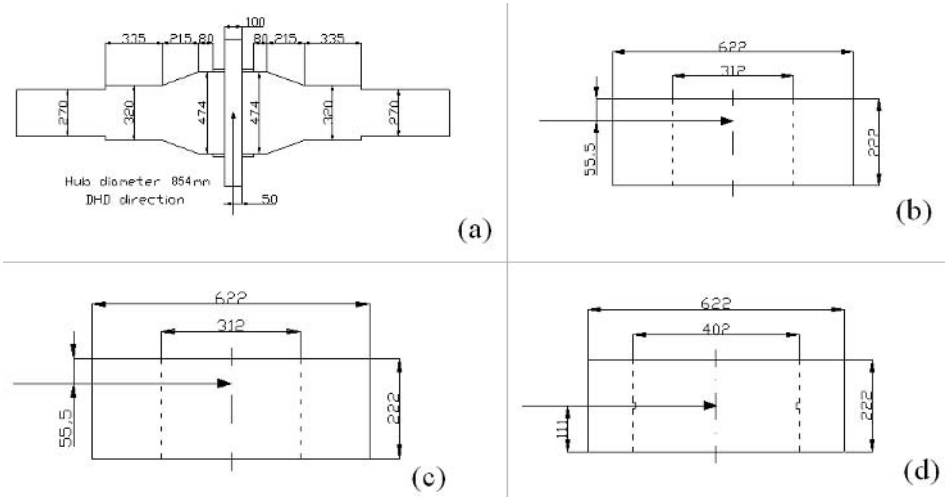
Specimens geometry and the direction of deep hole drilling method ((a). universal roll, (b) unmachined sleeve,(c) machined sleeve, (d) machined sleeve with a bearing fitted).
